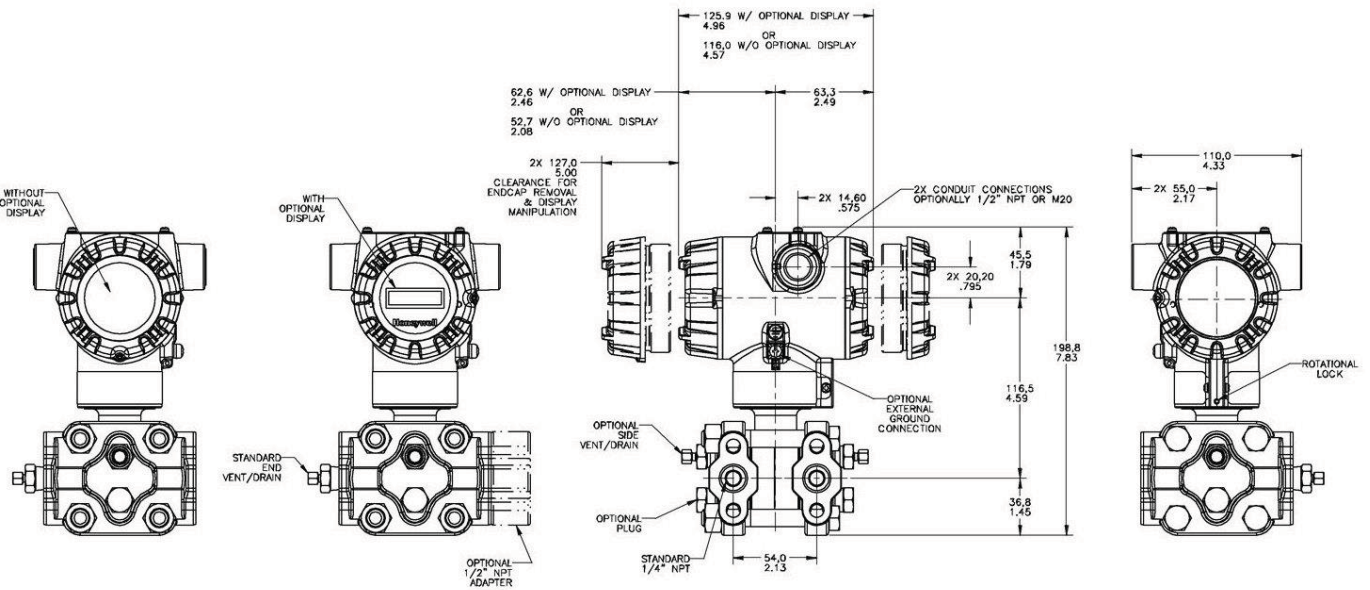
Typical mounting dimensions of STD810, STD820, STD830 & STD870 for reference
